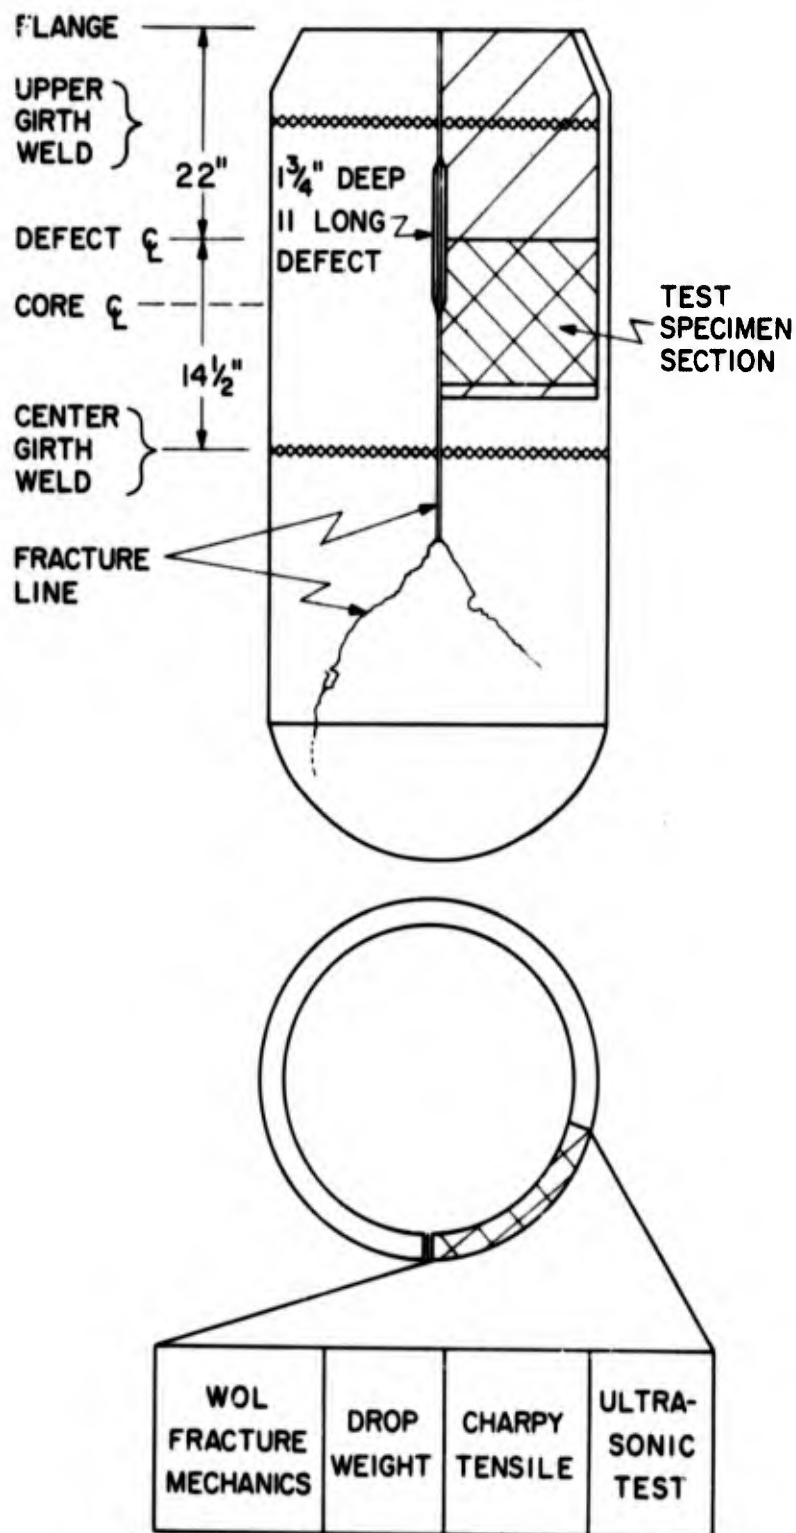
Schematic drawing of the PM-2A reactor pressure vessel showing the artificial defect, fracture, and location of material removed for metallurgical test specimens
